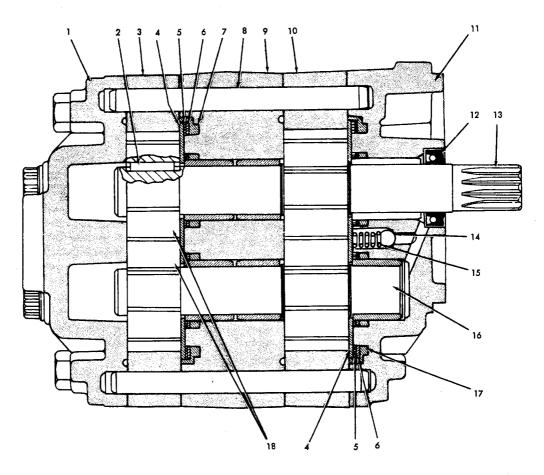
Transmission Oil Pump (HD6EP Eff. S/N 18754 and Up, HD7G Eff. S/N 24276 and Up) (T-72353)
